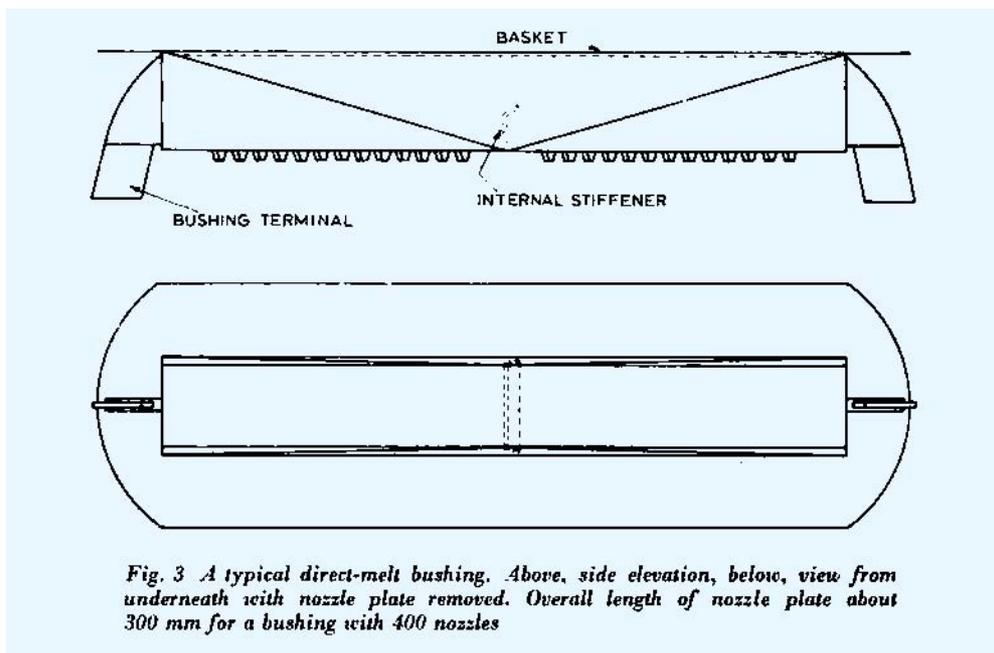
A typical direct-melt bushing. Above, side elevation, below, view from underneath with nozzle plate removed. Overall length of nozzle plate about 300 mm for a bushing with 400 nozzles
